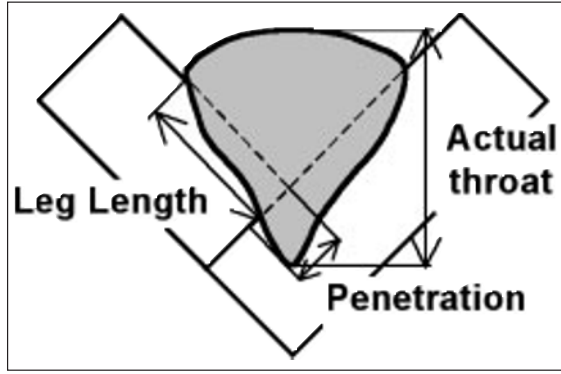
Nomenclature of the weld geometry in GMAW fillet weld
